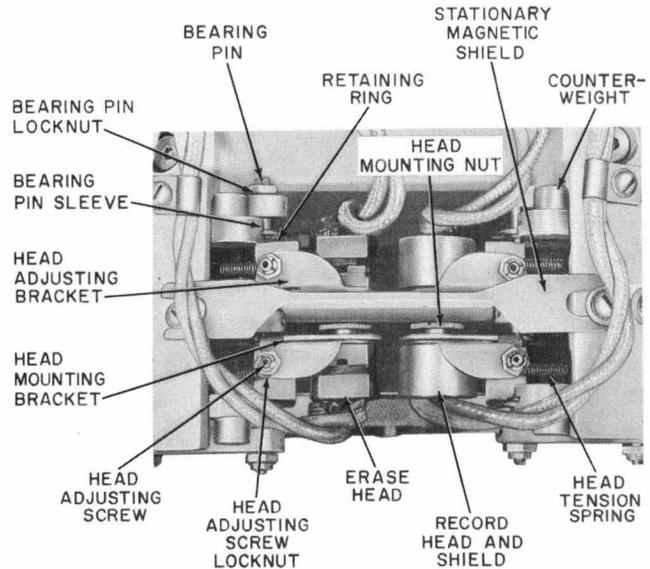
KS-12068 L3 and L3 Converted per X-4174 Recorder-Reproducers — Erase and Record Head Assembly and Associated Parts
